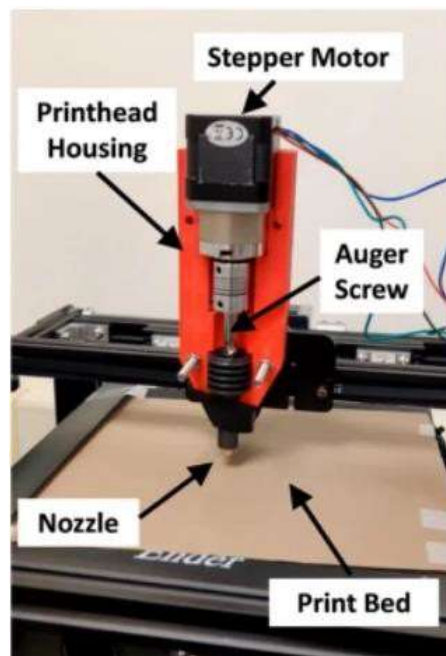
Cross sectional view of DIW screw printer housing. This setup investigated printing parameters. Figure reprinted with permission from [16].
